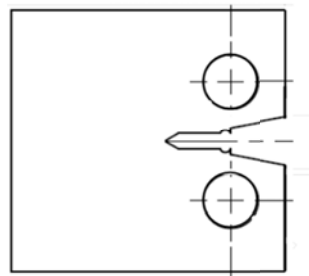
Drawing of the CT specimen used, showing the integral knife edges
